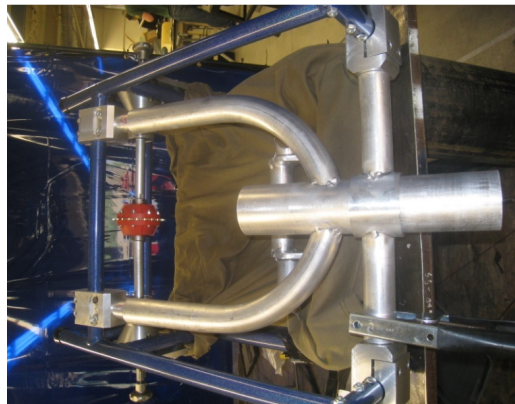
Subframe assembly mocked up and tack welded in wheelchair frame.
